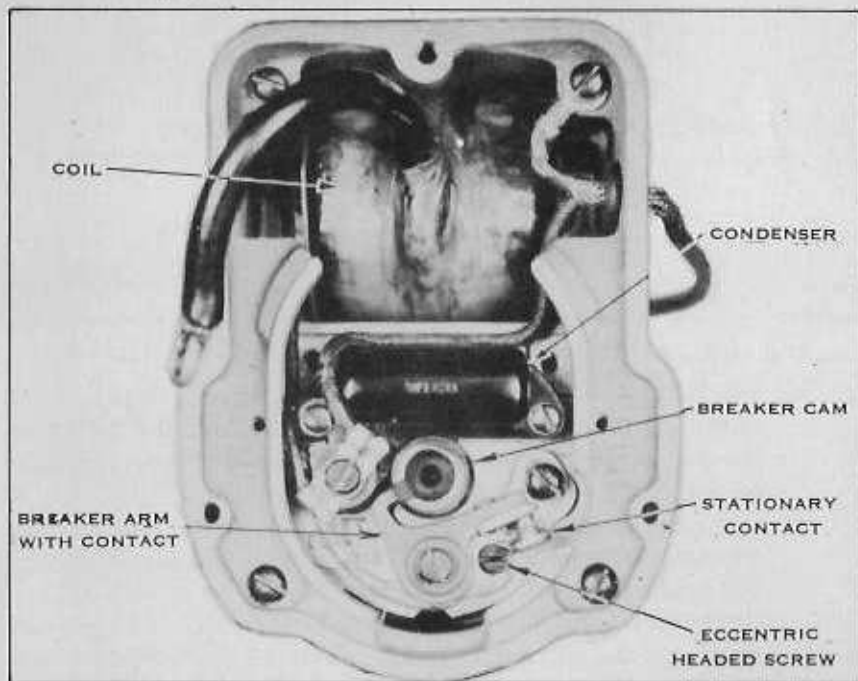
MAGNETO (SHOWING BREAKER MECHANISM)
